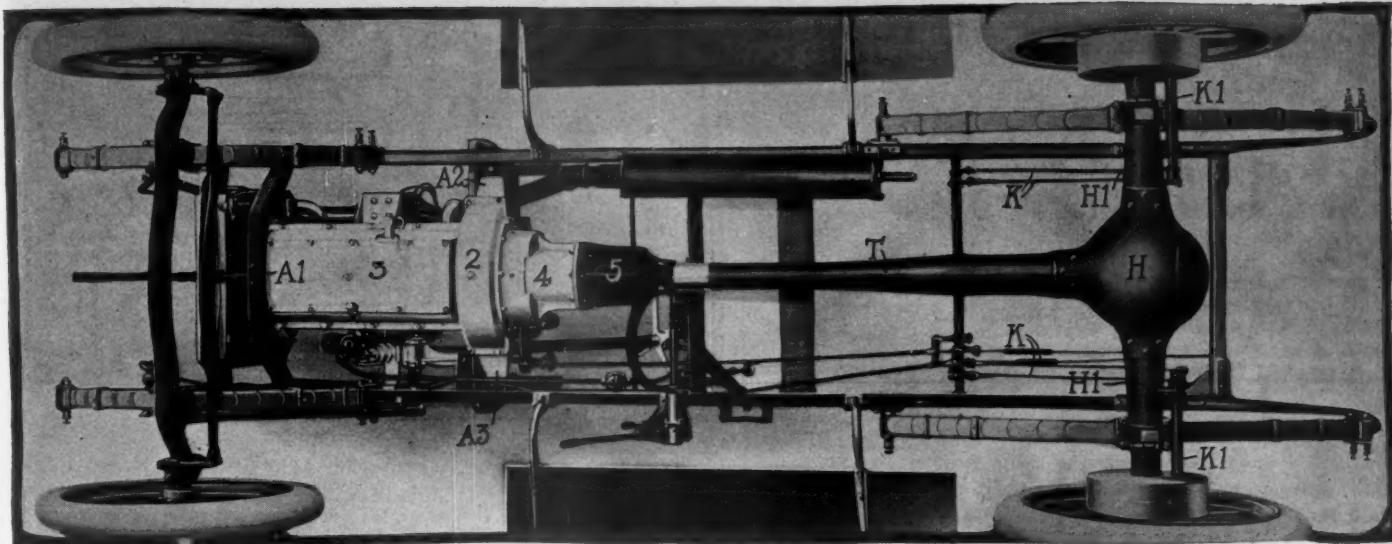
UNDER VIEW OF OHIO CHASSIS SHOWING THREE-POINT SUSPENSION AT POINTS A1, A2 AND A3
